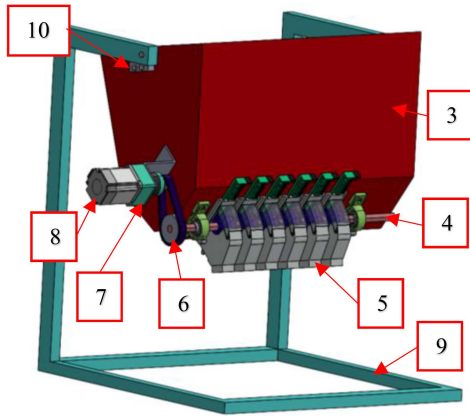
3D model of the laboratory test stand, where: 3 — hopper, 4 — seed metering units, 5 — drive shaft, 6 — chain drive, 7 — BLDC motor, 8 — planetary gear, 9 — frame, 10 — wedge.
